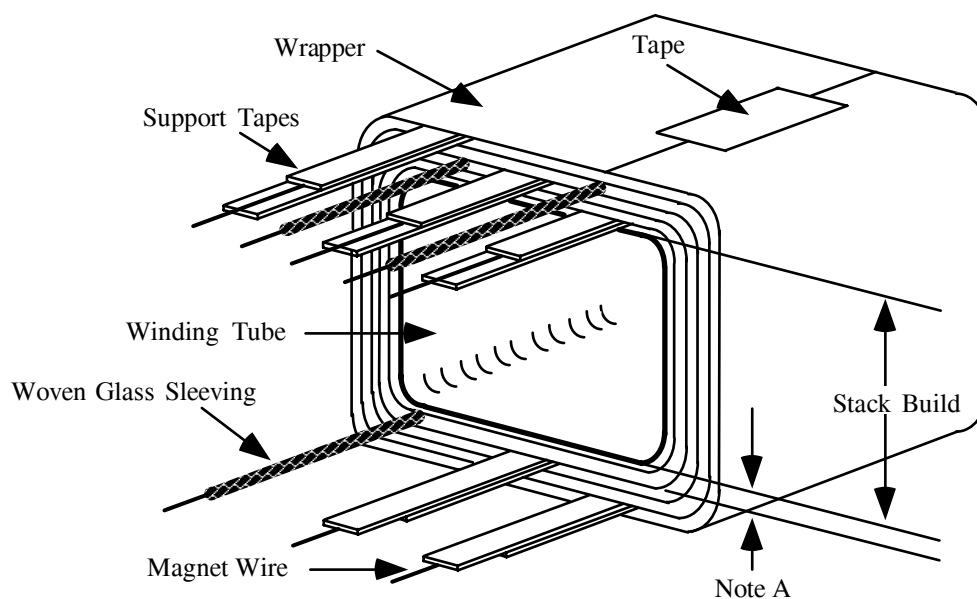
Completed Layer, Wound Coil Assembly.
